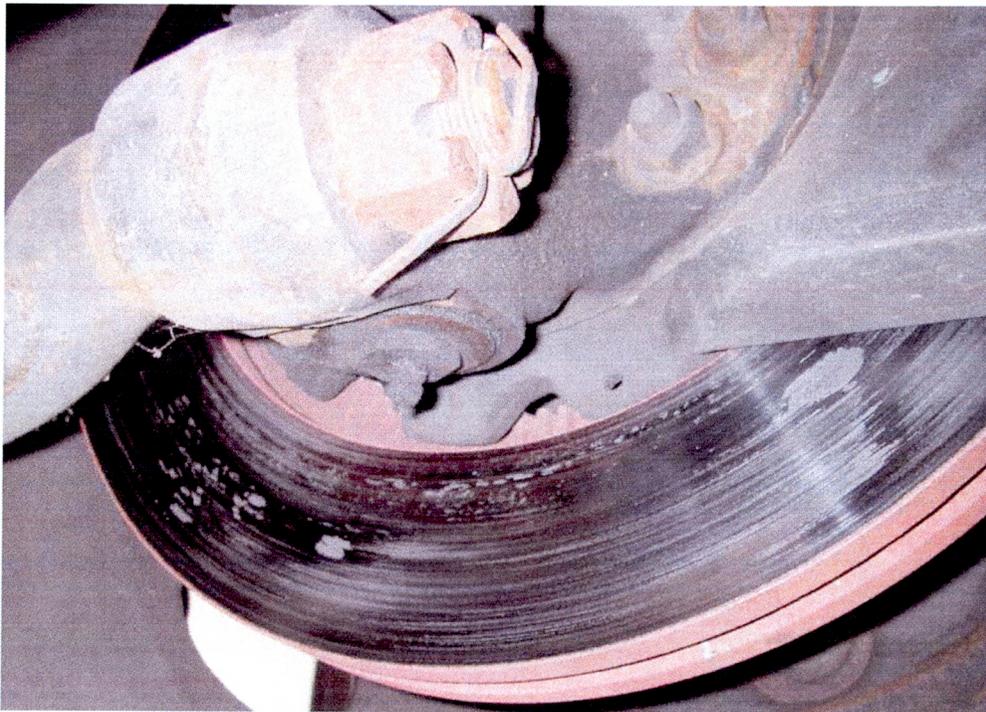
Lining Material Transfer and Pitting on the Left Front Brake Rotor, Indicating High Brake Temperatures
